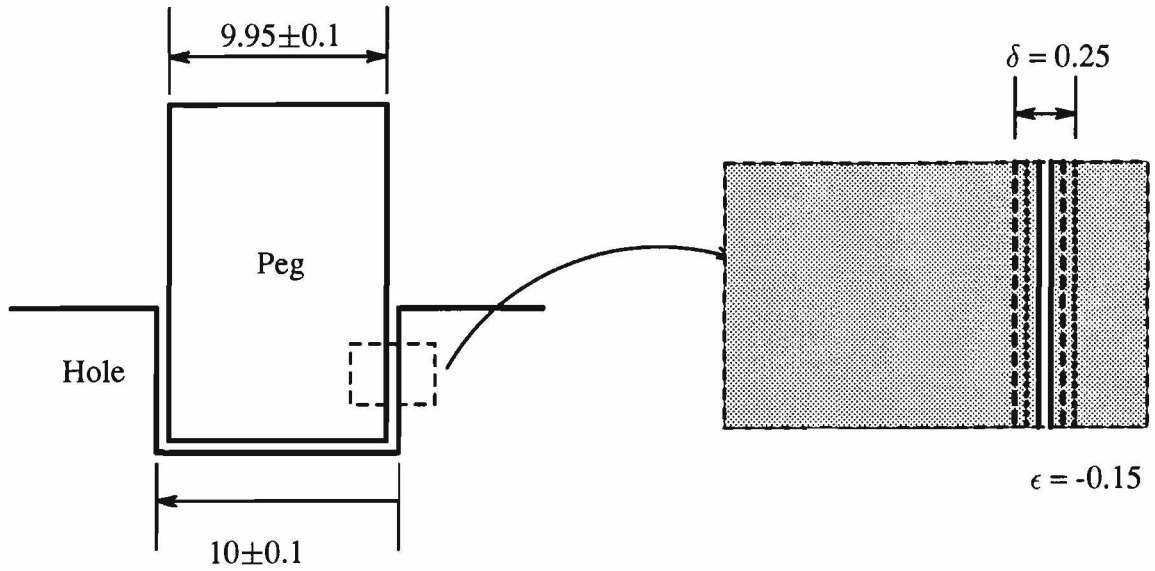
The tolerance zone of the hole and the enlarged peg.
